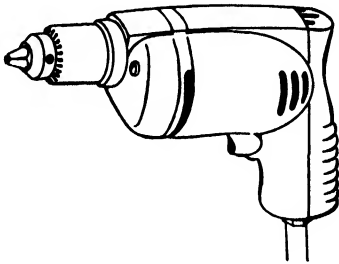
A small-size electric drill is a most useful tool for the shop.
